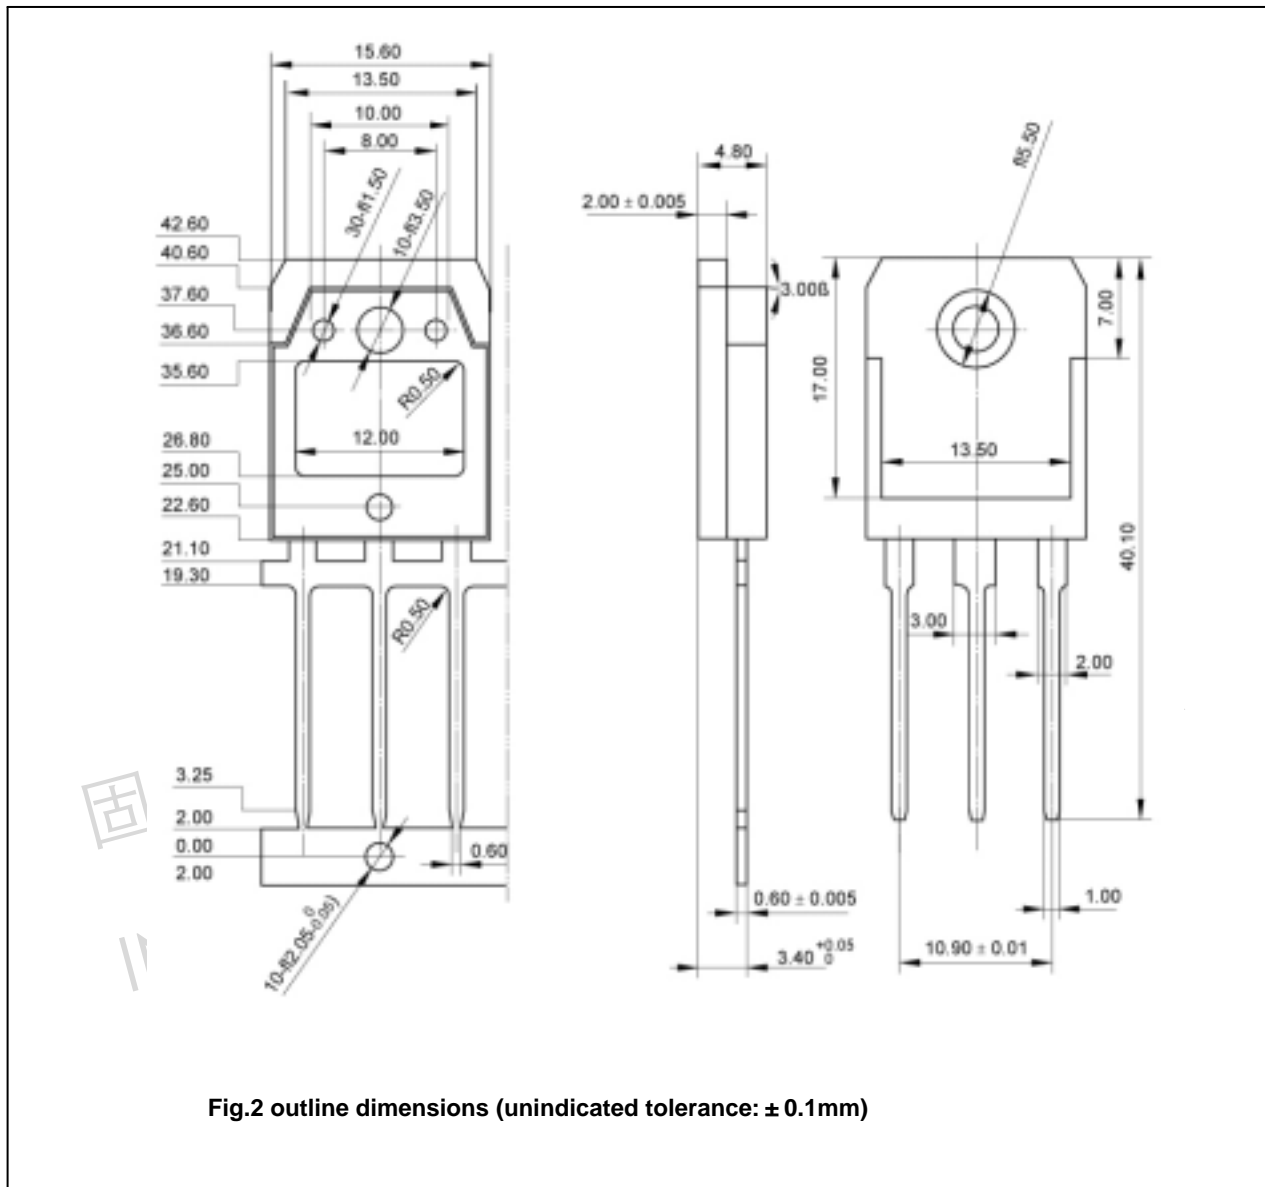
outline dimensions (unindicated tolerance: $\pm 0.1\text{mm}$)
